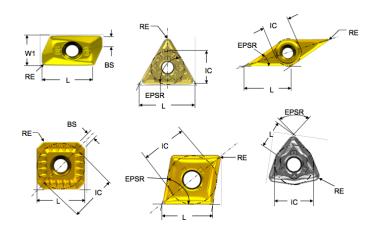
Cutting Tool Measurement Diagram 3 (Cutting Item – ISO 13399)
